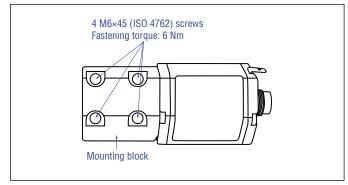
Mounting of RD4's sensor electronics housing (example of bottom cable entry)
